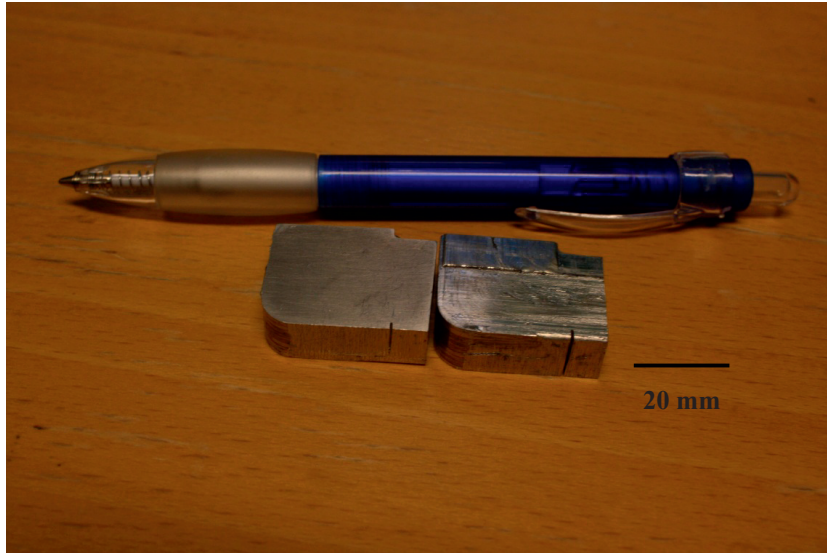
Overview of the successfully processed Al/Al sheet composite. (Sample 705MB). The right part depicts the outer surface and the left part shows the inner surface after ECAP.
